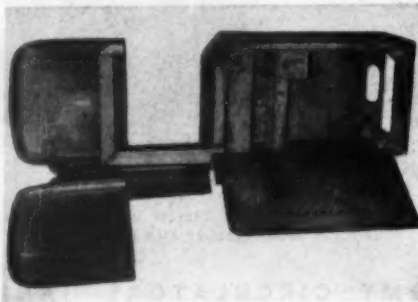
All-Welded Steel Frame for the Parks Woodworking Machine Co., Cincinnati, Ohio. Sides are brake formed from 12 gauge metal.
